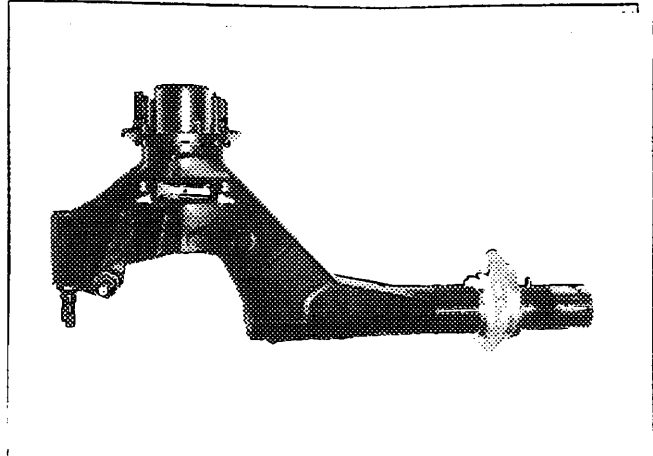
REAR ADJUSTABLE STABILIZER ASSEMBLY
